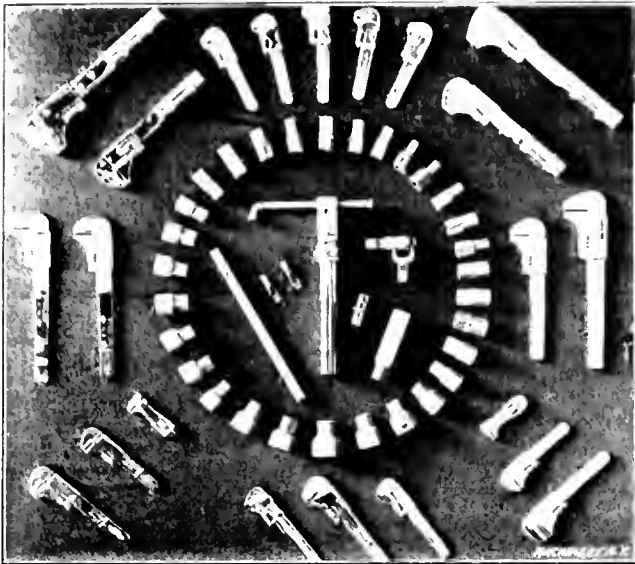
Various Styles of Socket and Adjustable Wrenches
